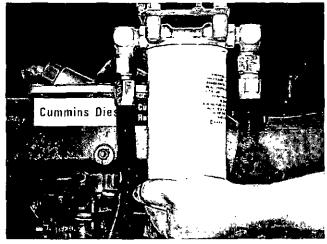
(V11909) Changing throw-away type fuel filter
